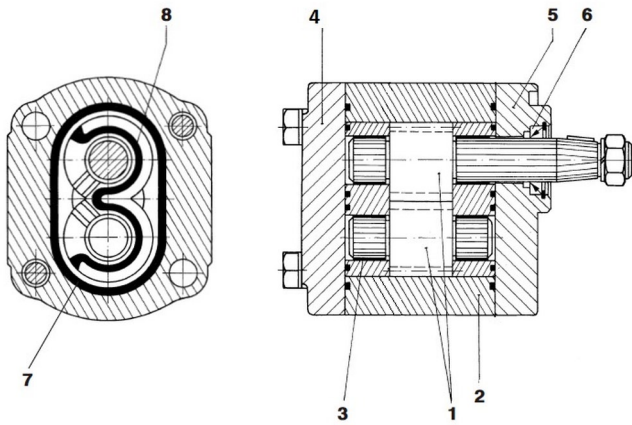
External gear pump (1-couple of gears, 2-housing, 3-bearing, 4-rear cover, 5-front cover, 6-shaft seal, 7-seal to prevent external leakage, 8-axial clearance compensating seal)
